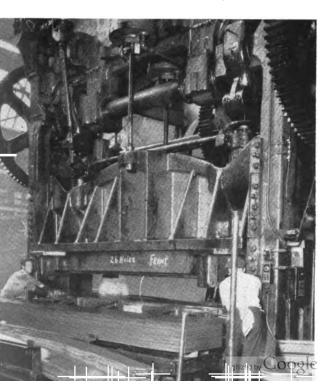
Blanking a piercing the steel she which are later formed in automobile frame si members. This provelghs 275,000 pounds has a crankshaft 11 incl in diameter.
